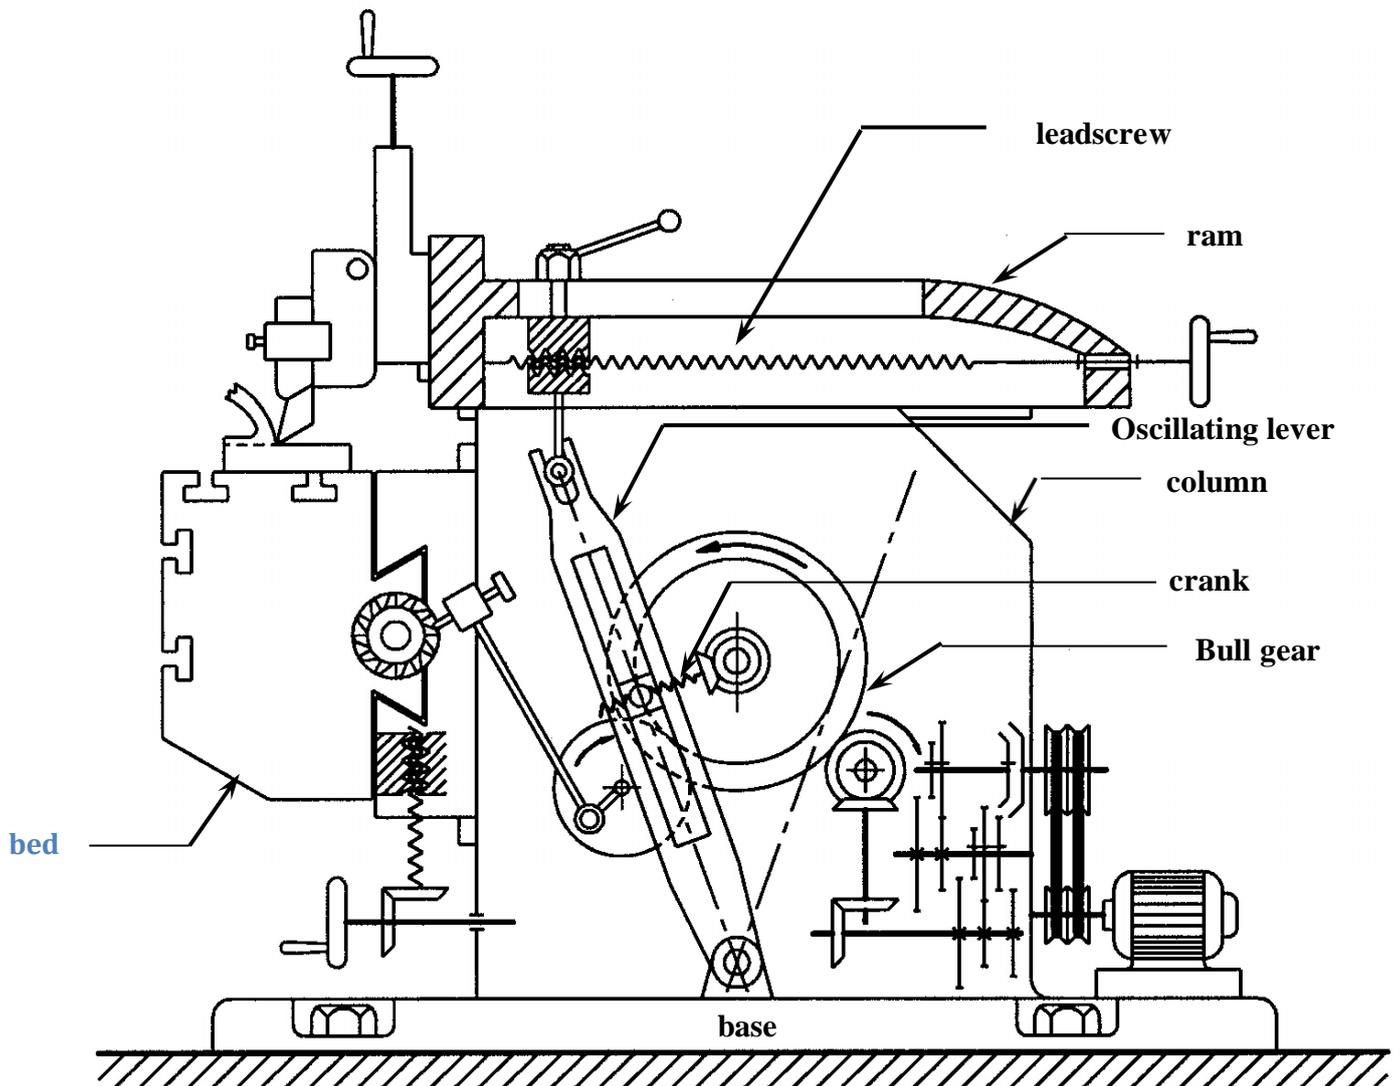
Kinematic diagram of a shaping machine.
